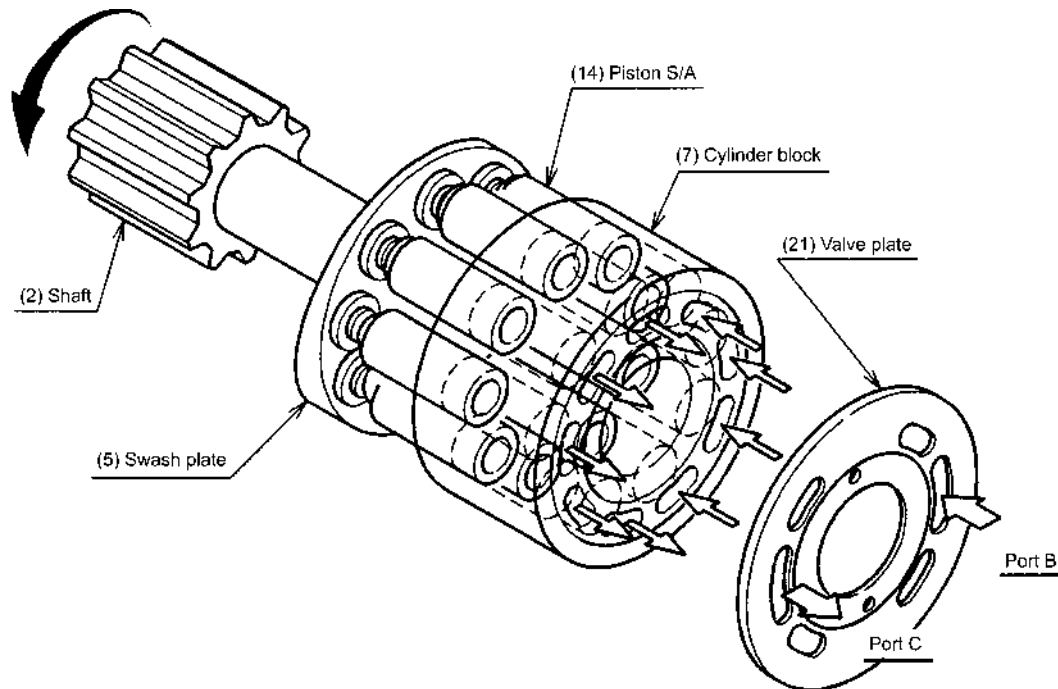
Structural drawing of swash-plate-type axial piston motor
